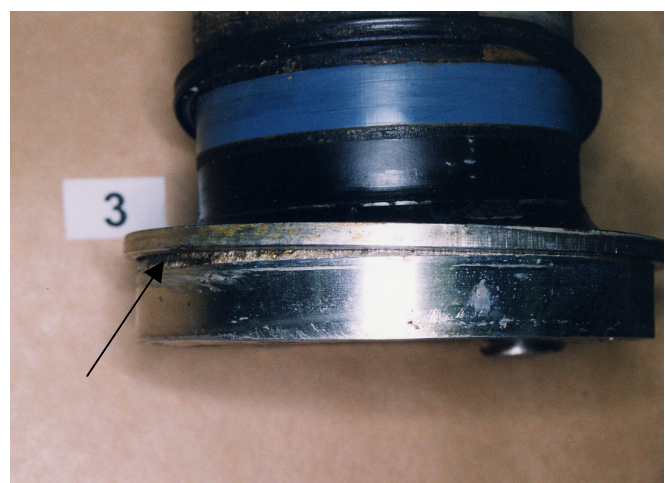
Blade base flange, showing the shear failure of the rim edge under bending loads.
